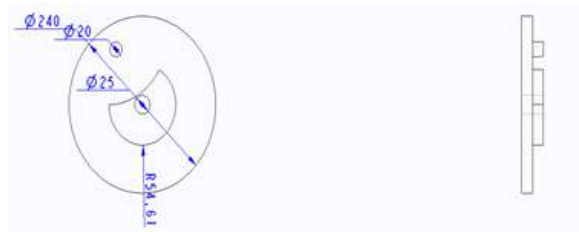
DRIVER WHEEL 2D DESIGN
